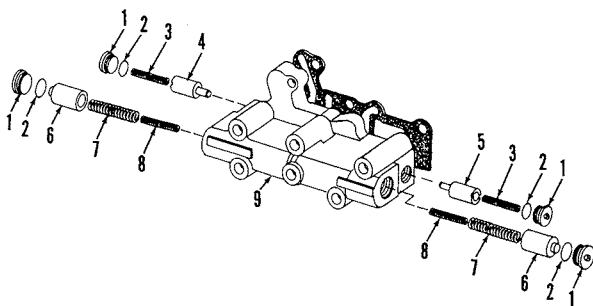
The modulating valve assembly modulates engagement of C3 clutch pack and B4 brake pack to provide smooth speed increase when shifting into transport speeds (12F-15F).
